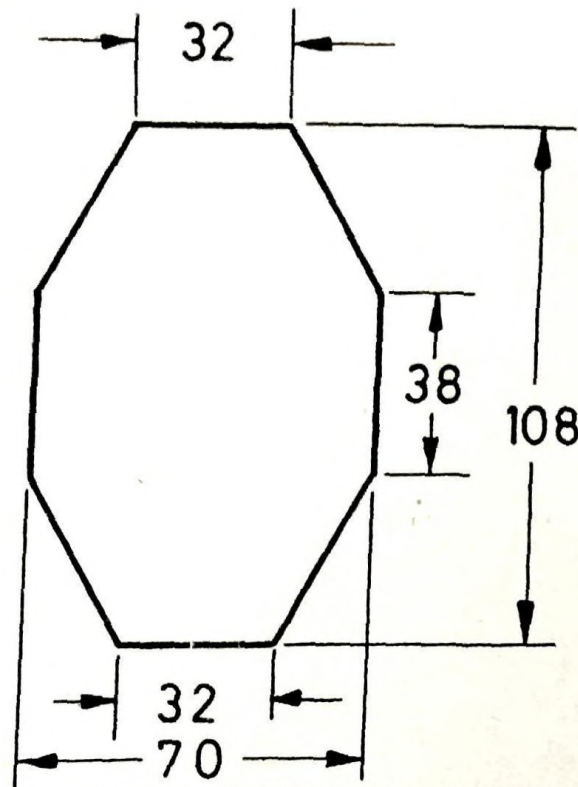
TEST (DE MATTIA TYPE) PIECE FOR FLEXING TEST
